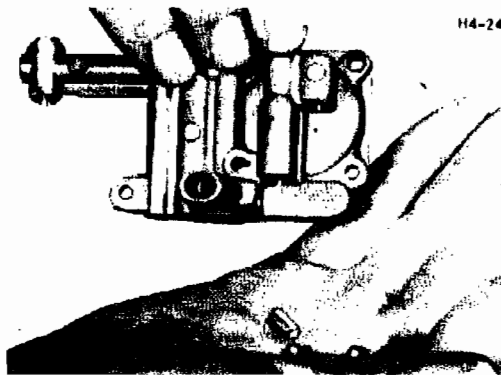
Removing Pump Inlet and Discharge Valve Balls and Weight
